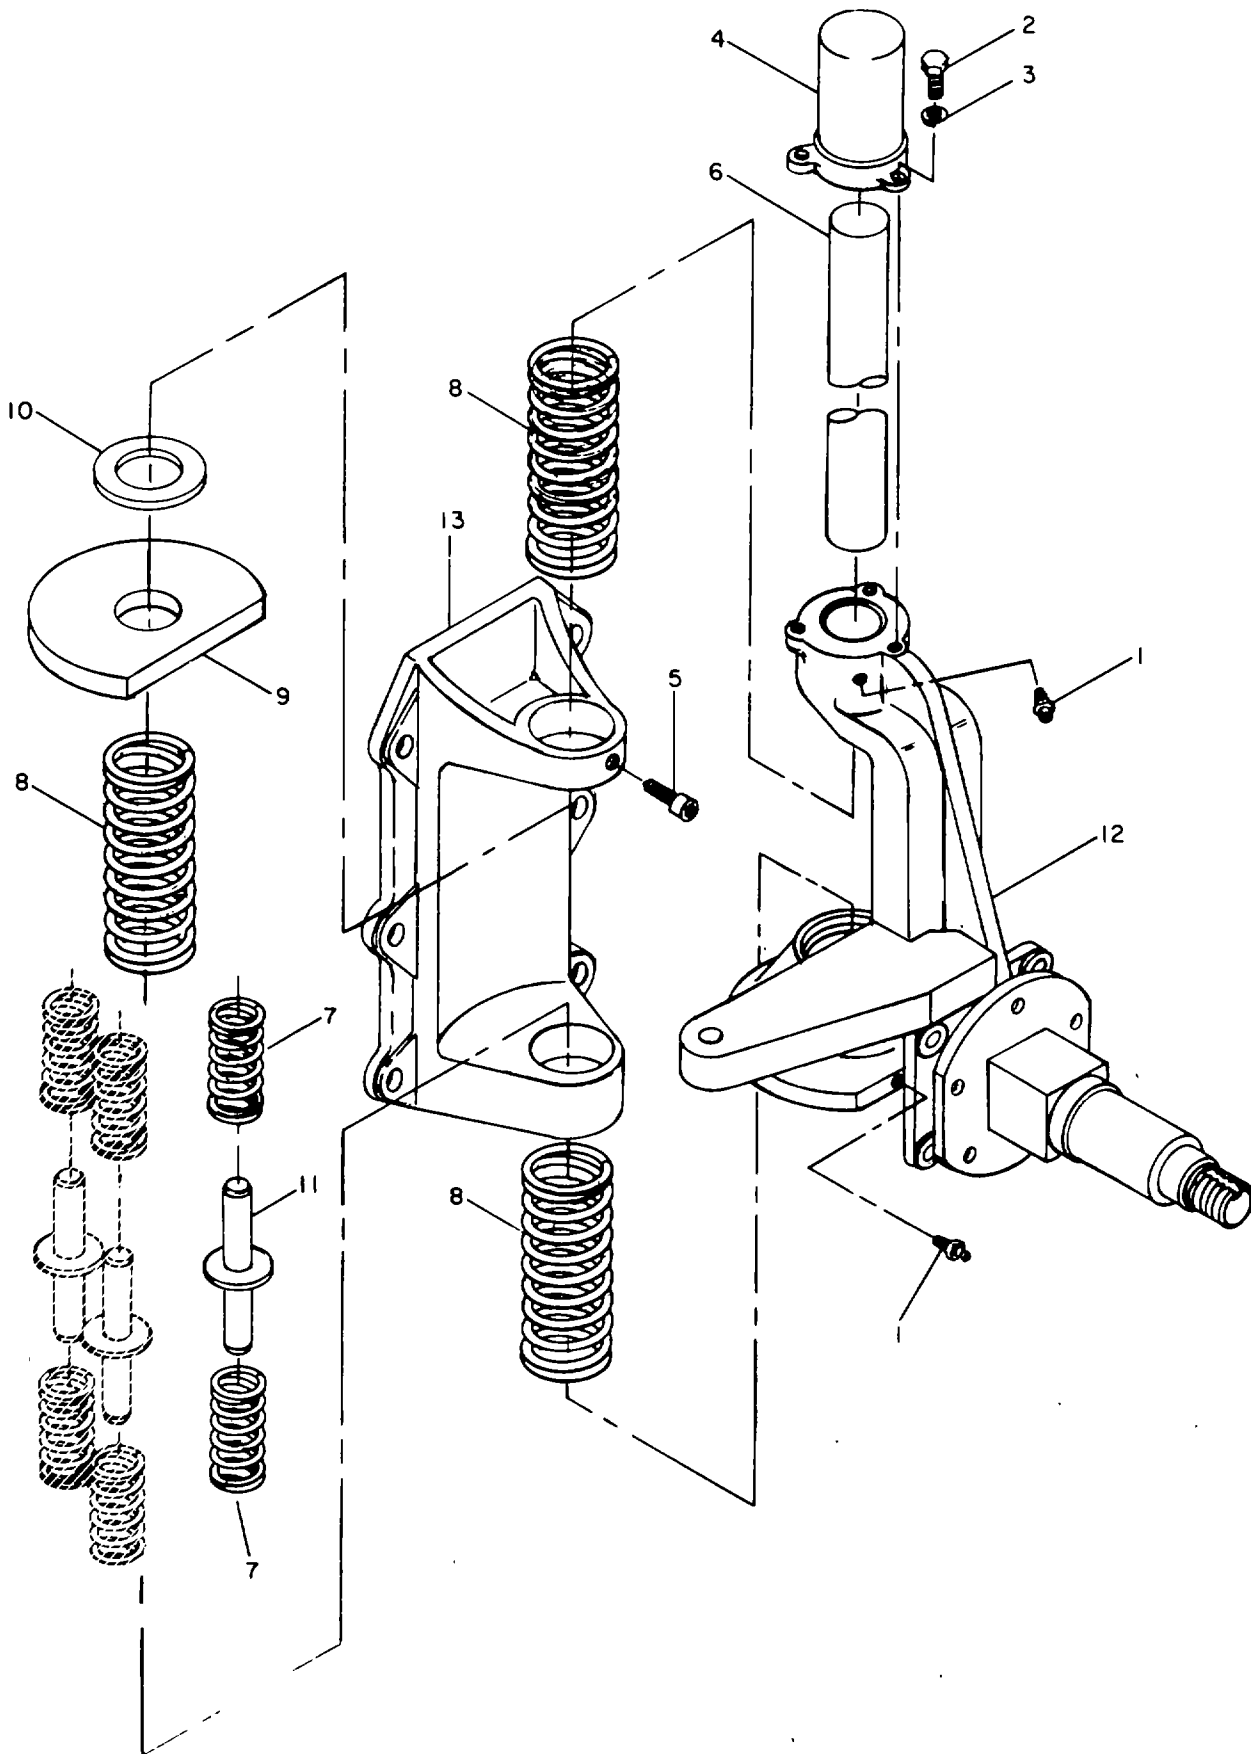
Wheel mount shock-absorbing spring assembly (used on front transporter assembly only)
